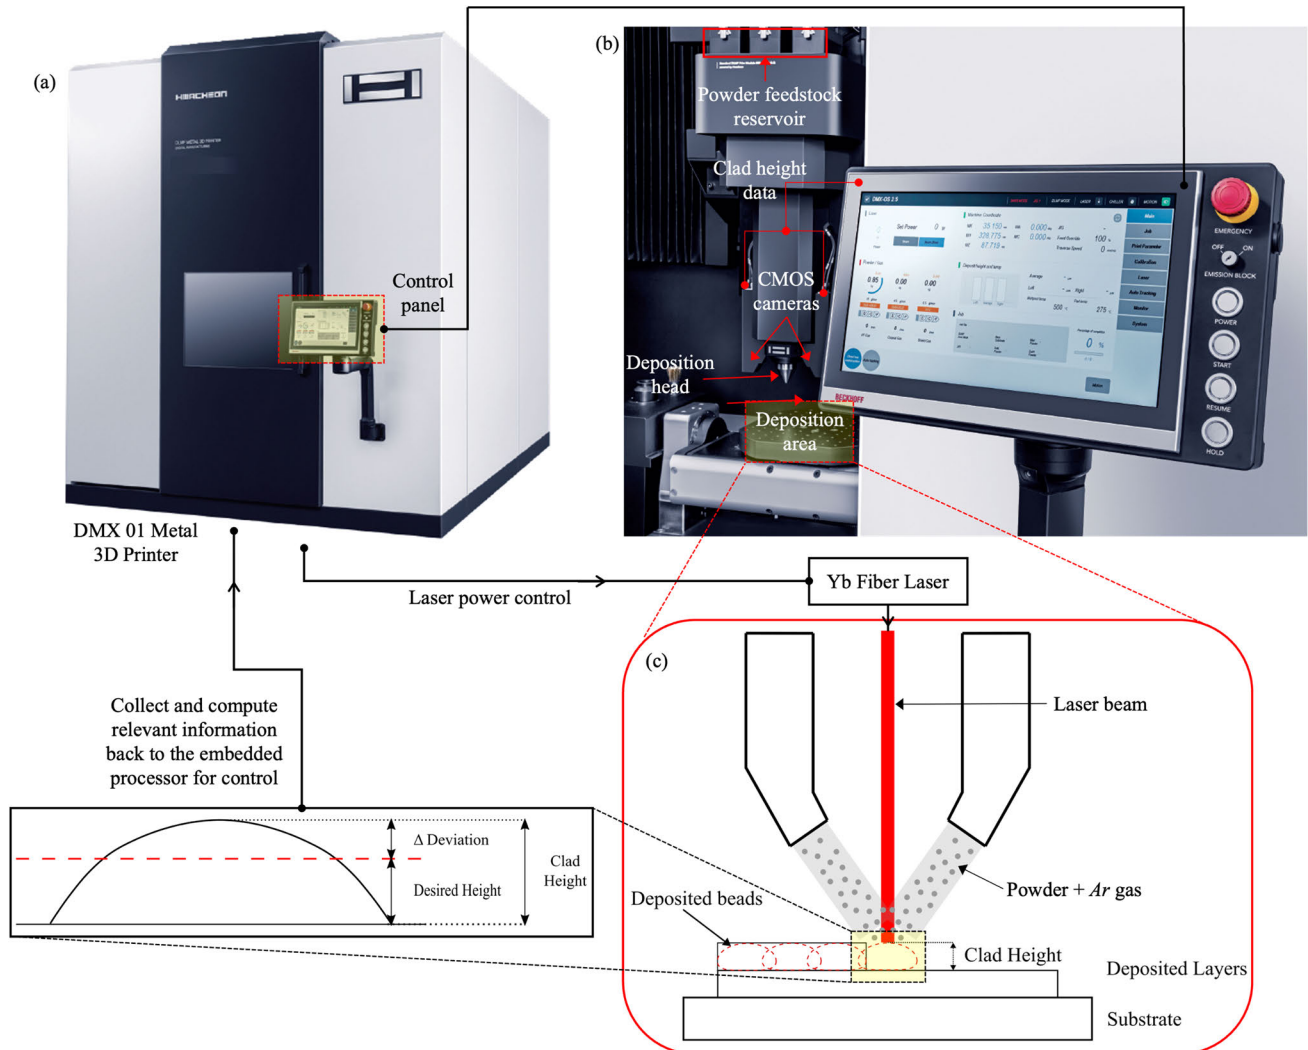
A schematic diagram of DLMF system hardware: (a) DMX 01 Metal 3D printer, (b) DMX 01 deposition head (Standard DLMF Print Module 800) that is equipped with dual machine vision-based (CMOS) cameras and powder feeder delivery system, along with a magnified control panel, and (c) DLMF process illustrating the laser-powder interaction with its resultant clad.
